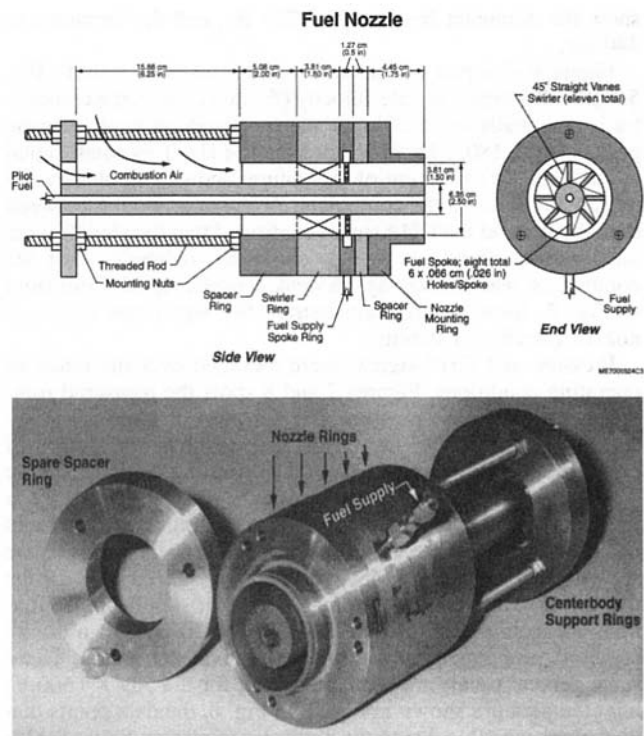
Sketch and photographs of the fuel nozzle. The fuel nozzle is comprised of various "rings" which can be stacked on the threaded rods to produce different nozzle geometries. Eleven straight-blade vanes (set at 45 deg) provide swirl.
